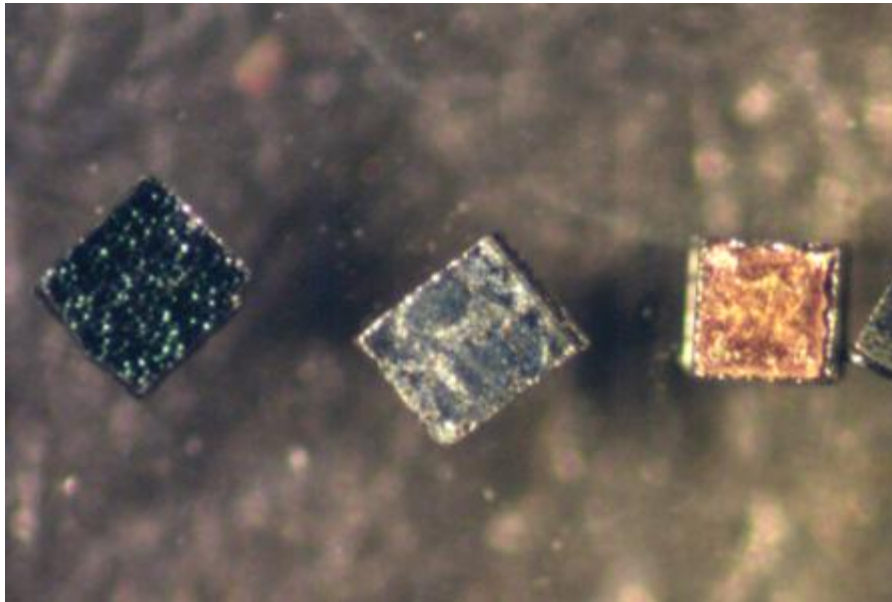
Fabricated parts. From left to right: The SiO₂ face of an assembly part, the diced edge of an assembly part, and the Copper coated face of a part
